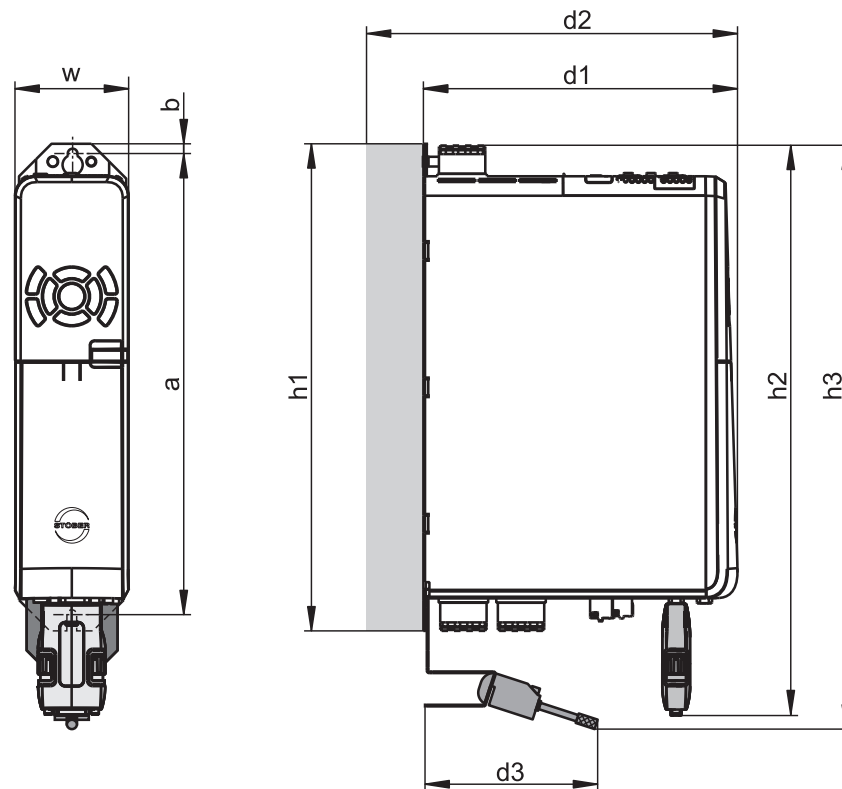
SD6 dimensional drawing, sizes 0 to 2
